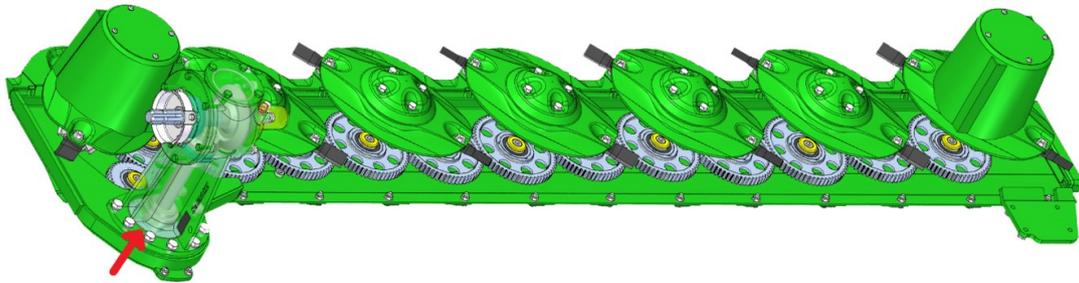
Right-hand cutting unit of KDD 860 disc mower
